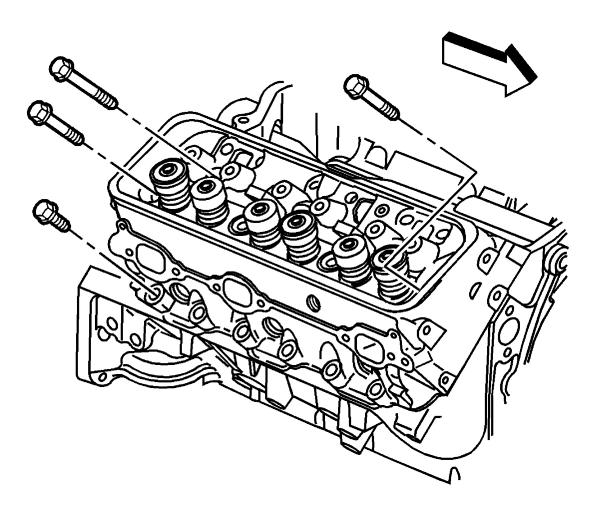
Locating Cylinder Head Bolts (Right) Courtesy of GENERAL MOTORS CORP.
